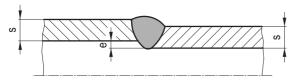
Misalignment of welds for vessels and piping
